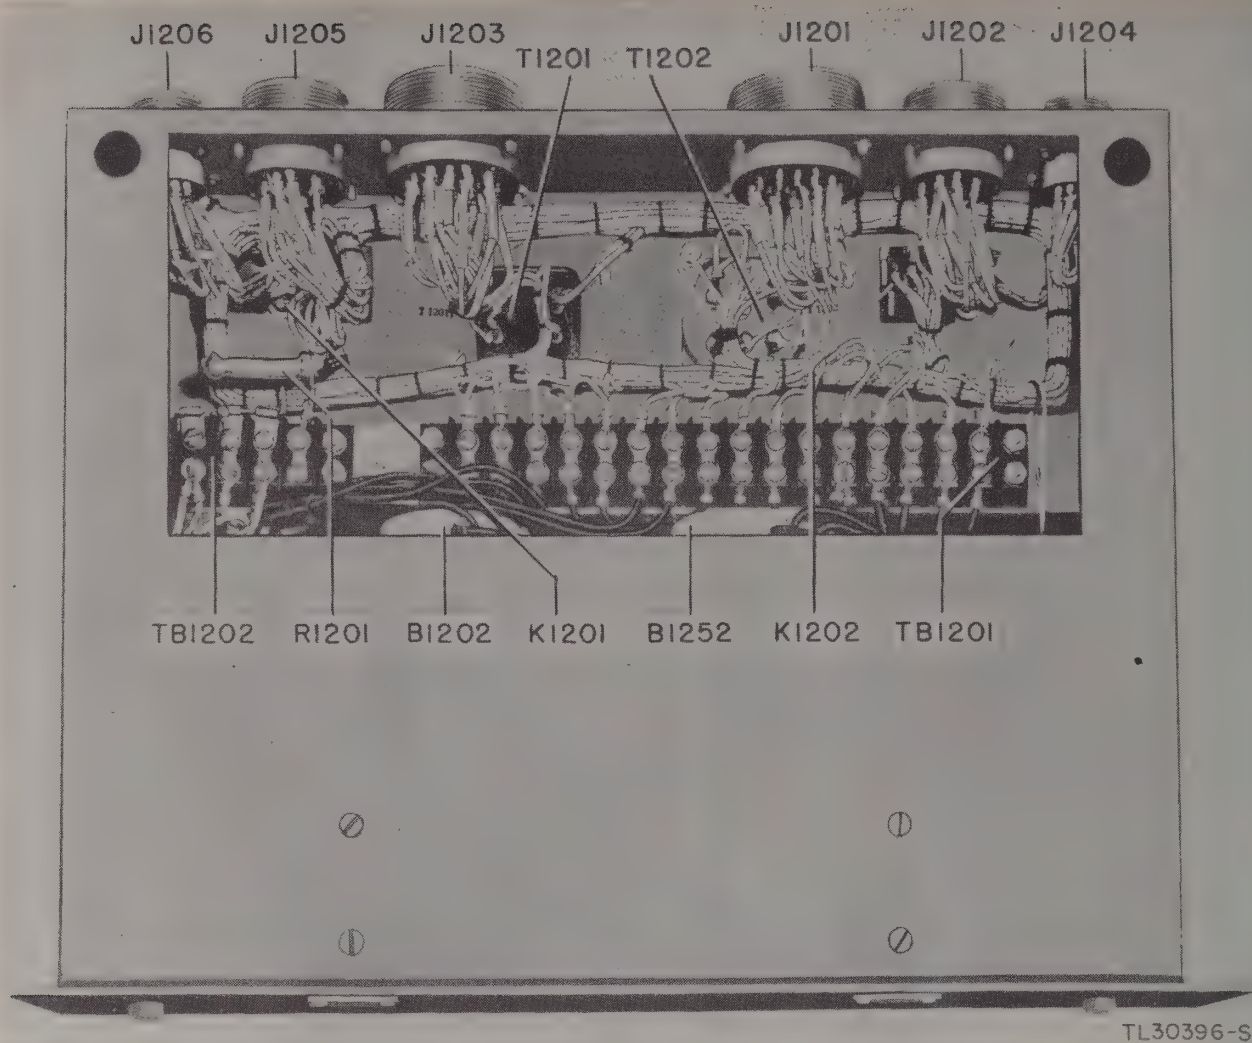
Antenna position indicator unit, bottom view, parts identified.
